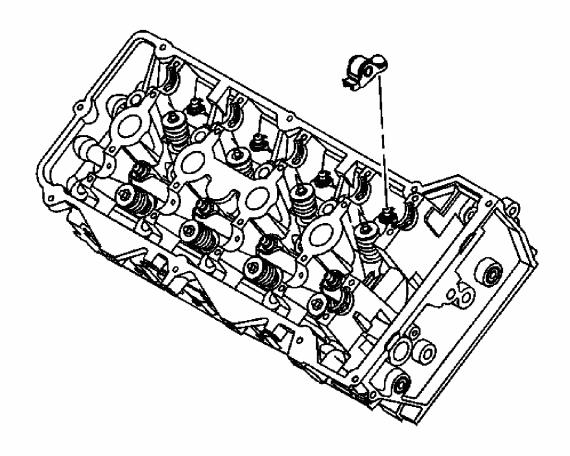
View of Camshaft Followers Courtesy of GENERAL MOTORS CORP.
